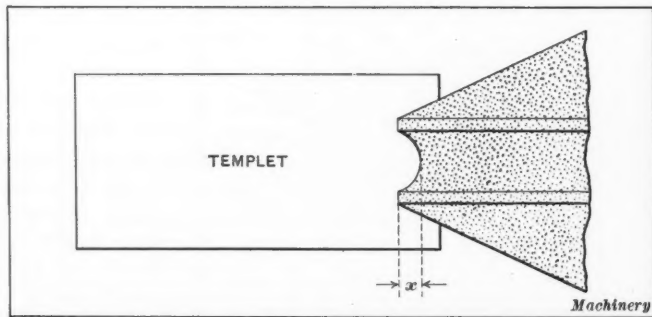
Section of Wheel dressed for grinding Crest of Thread and Templet for testing Concave Groove in Wheel
